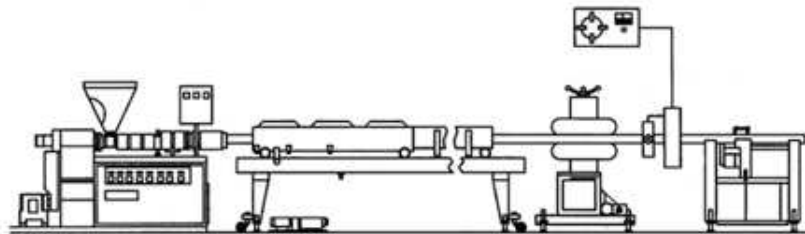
Arrangement of a standard profile extrusion line. From left to right: the extruder, the extrusion die, the calibration, the cooling track, the puller and the packaging unit [Kunz et al. (2004)].
